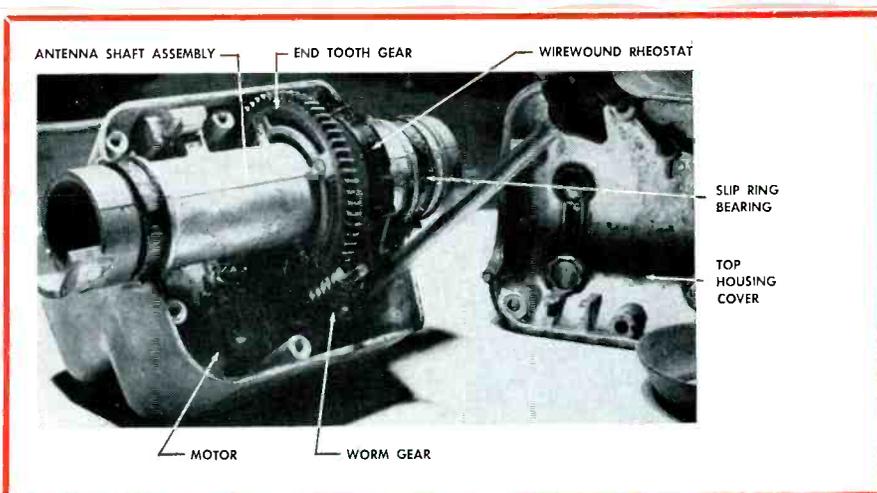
Inside a manual rotator. Notice the wirewound rheostat at the far end and also the worm gear that drives the antenna shaft assembly.
